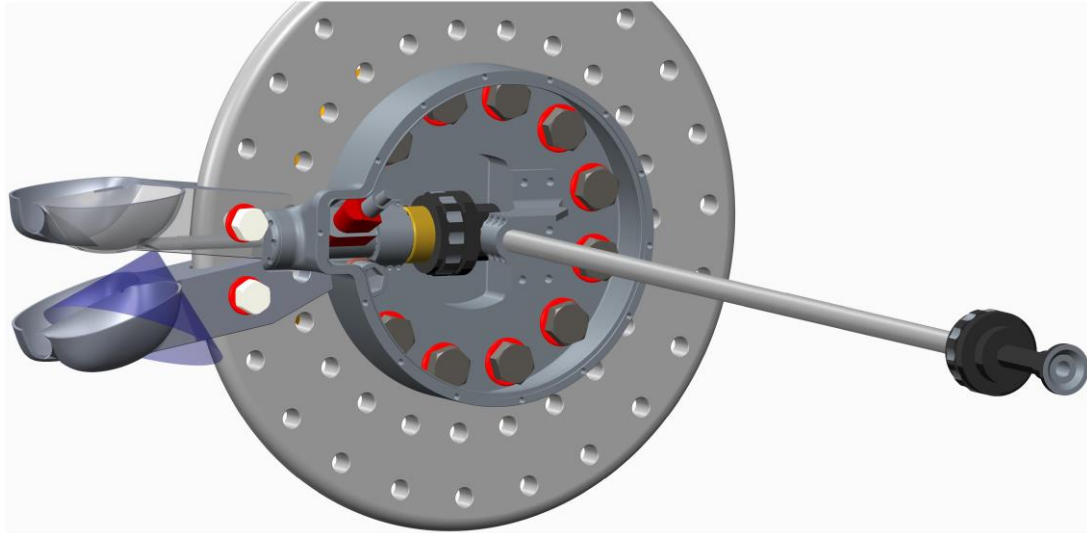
CAD-drawing from the design process, illustrating the desired setup
